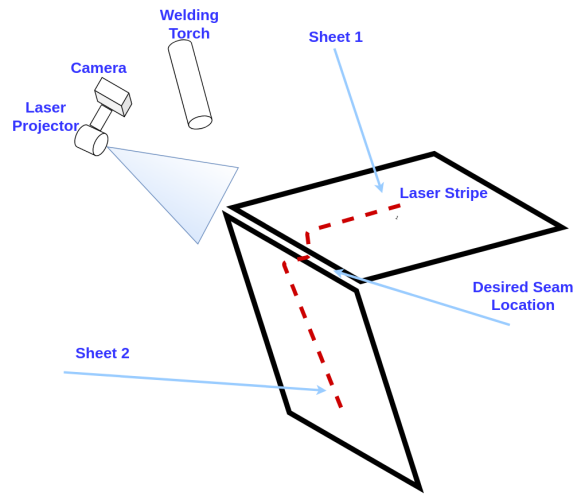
Welding robot configuration. The kinematic relationship between image and welding torch is calibrated.
